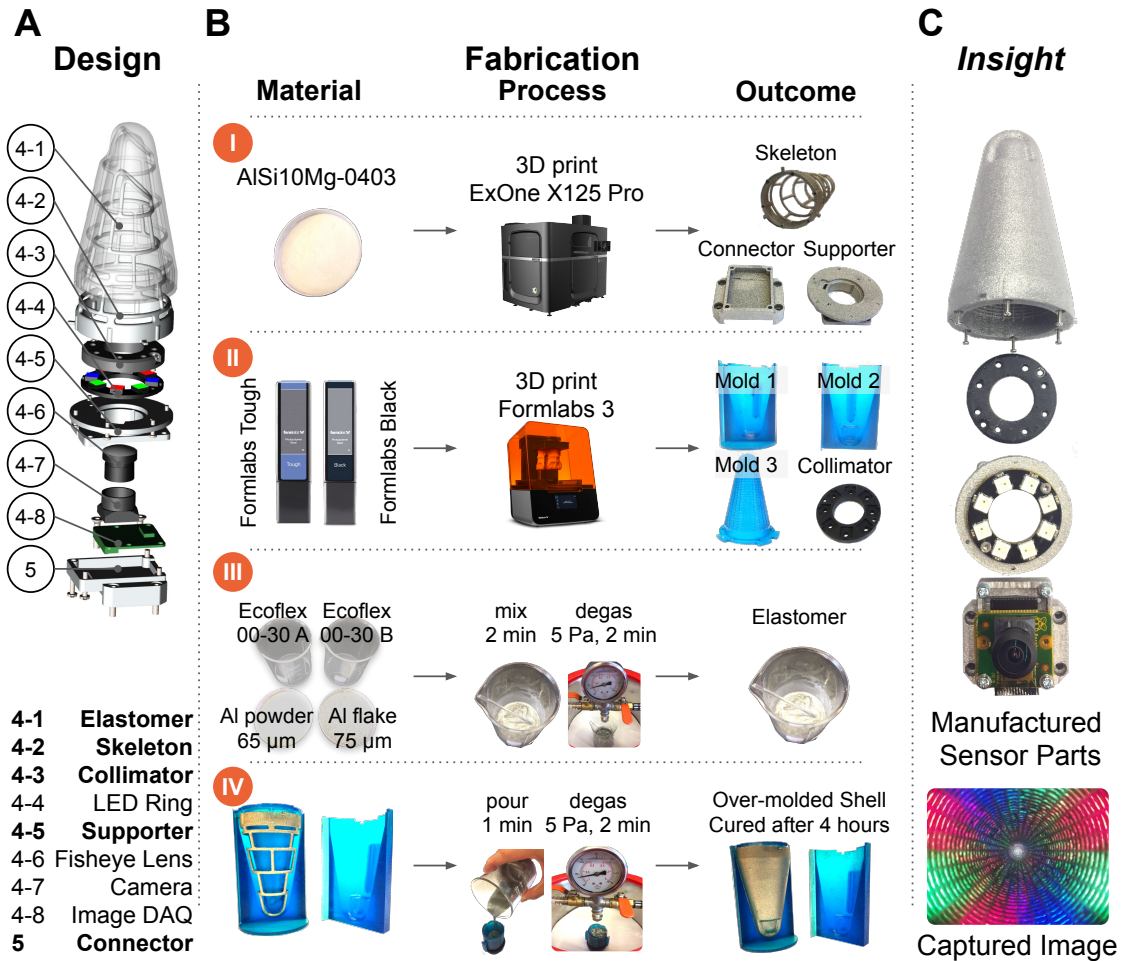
The fabrication process of *Insight*. A provides an exploded view of *Insight* with all parts in the design; bold items were custom-fabricated. B shows the materials, processing steps, and intermediate outcomes for the elastomer, the skeleton frame, the molds for over-molding, the collimator, and the over-molded sensing surface. C presents the partially assembled *Insight* and an image captured under no contact.
